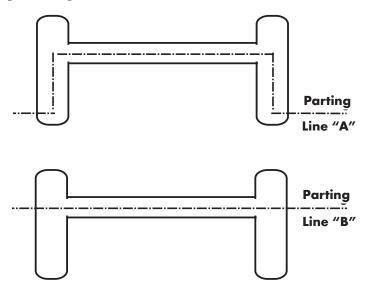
Step parting line "A," originally placed on this casting drawing would not have produced the best production results. The location of the parting line "B" in the bottom drawing will allow better casting fill and cleaner casting trim, plus provide longer die life and a less costly die to build.
